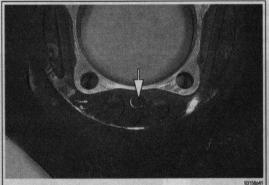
If replacing the steering knuckle, you must remove the retaining bolt and transfer the brake dust shield . . .
